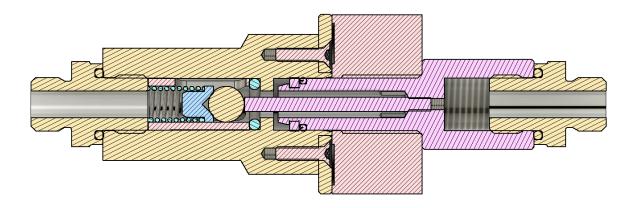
Decoupler Assembly section-view in CAD The constructional changes since last test (
